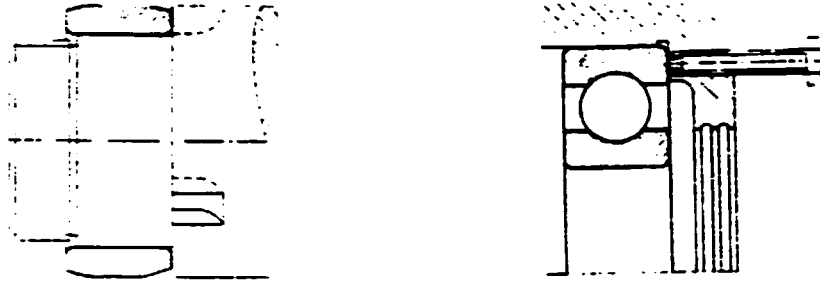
Grooves in a shaft shoulder for attaching the pulling-off tools
